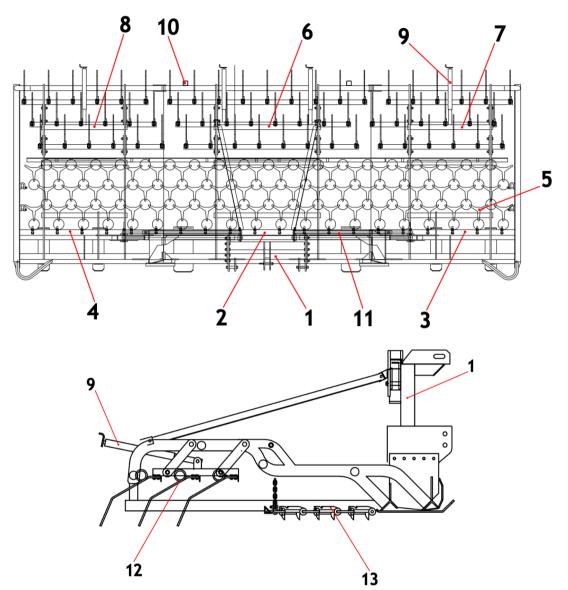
HYBRO weeder harrow (hydraulically folded version) (1 - drawbar, 2 - main frame, 3 - left frame, 4 - right frame, 5 - cast iron smoothing harrow, 6 - central weeder section, 7 - left weeder section, 8 - right weeder section, 9 - adjustment cranks, 10 - support feet, 11 - mechanical locking actuators, 12 - spring tine, 13 - cast iron)
